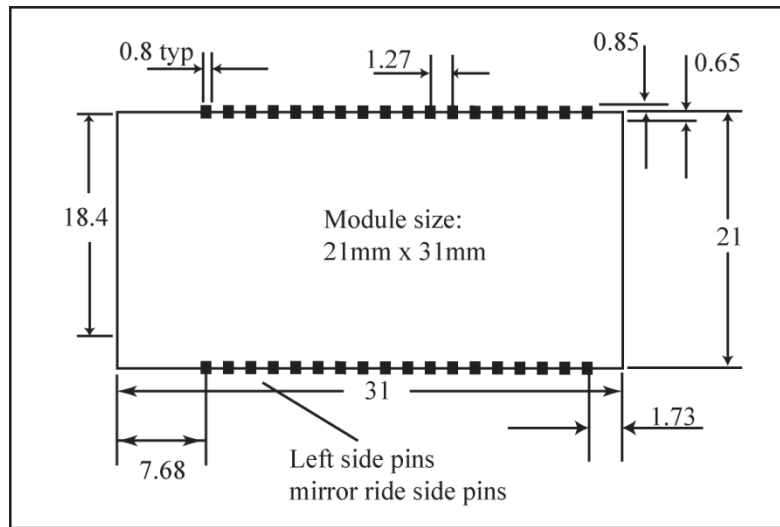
ZG2100M/ZG2101M Module Layout Pad Dimensions
